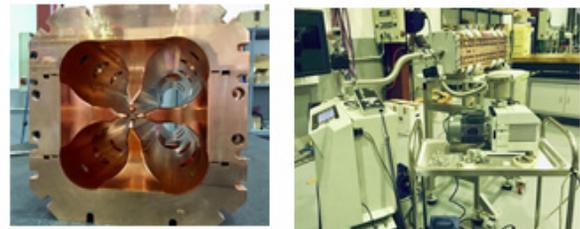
Left: A picture of the assembly of segment 1 of the RFQ. The channels for the O-rings and for the RF contacts can be seen. Right: Vacuum leak tests of segment 1.
